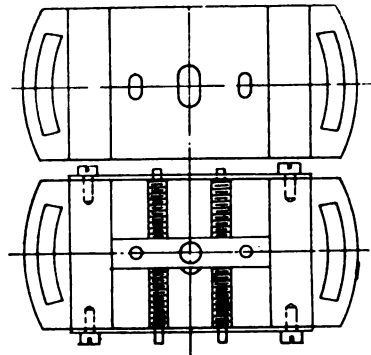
PLAN VIEWS OF SWIVELLING PARTS. DETAILS OF TAILSTOCK.
